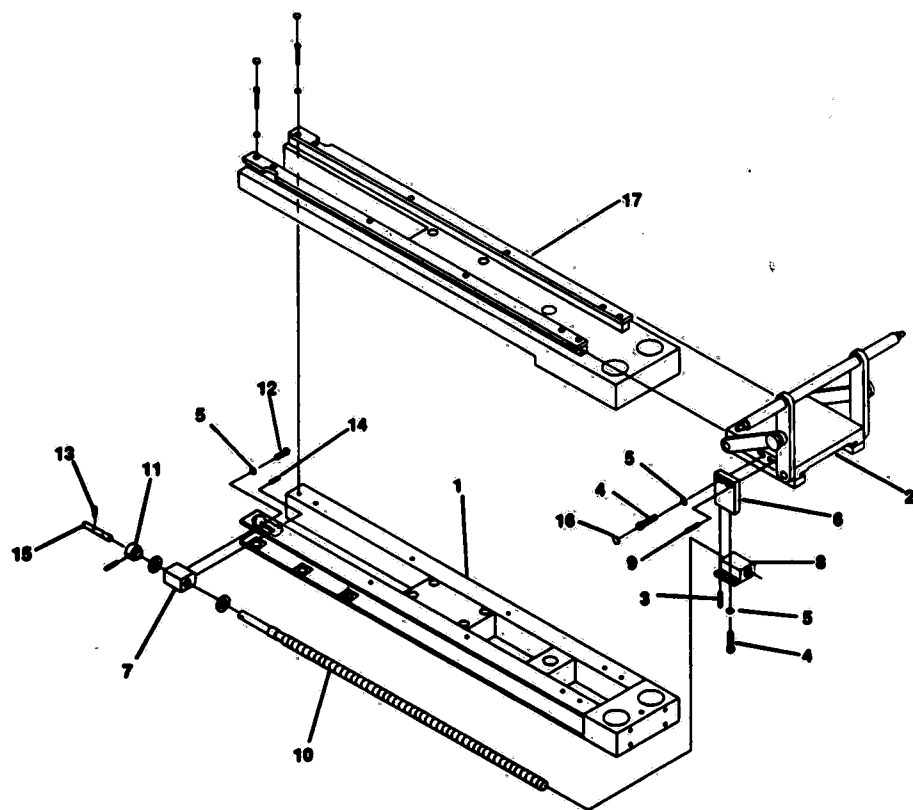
SPINDLE DRIVE ASSEMBLY.
